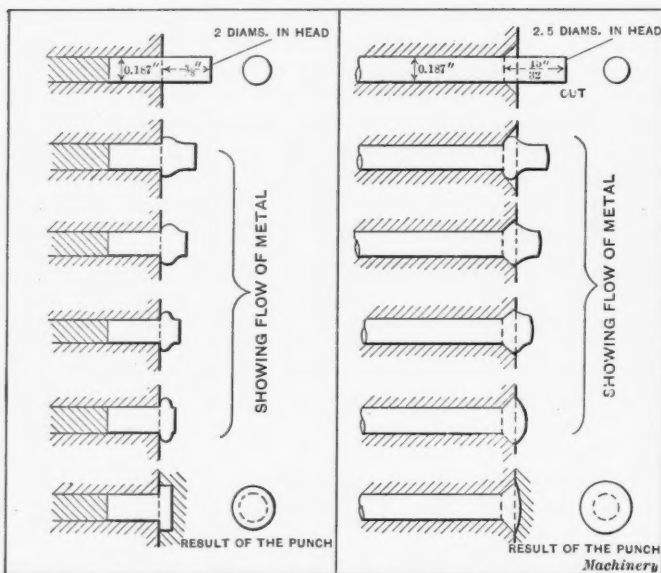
Evolution of Screw Blanks made on Single-stroke Cold-headers
